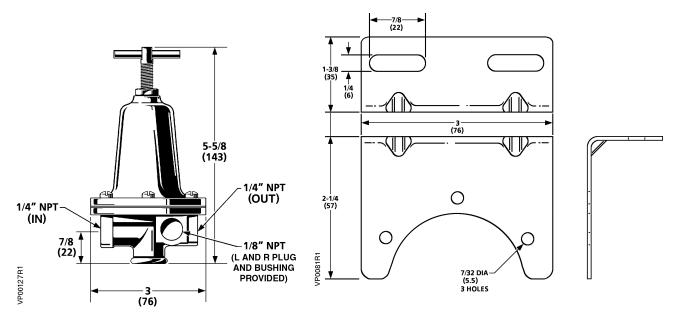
Pressure Reducing Valve and Mounting Bracket.
